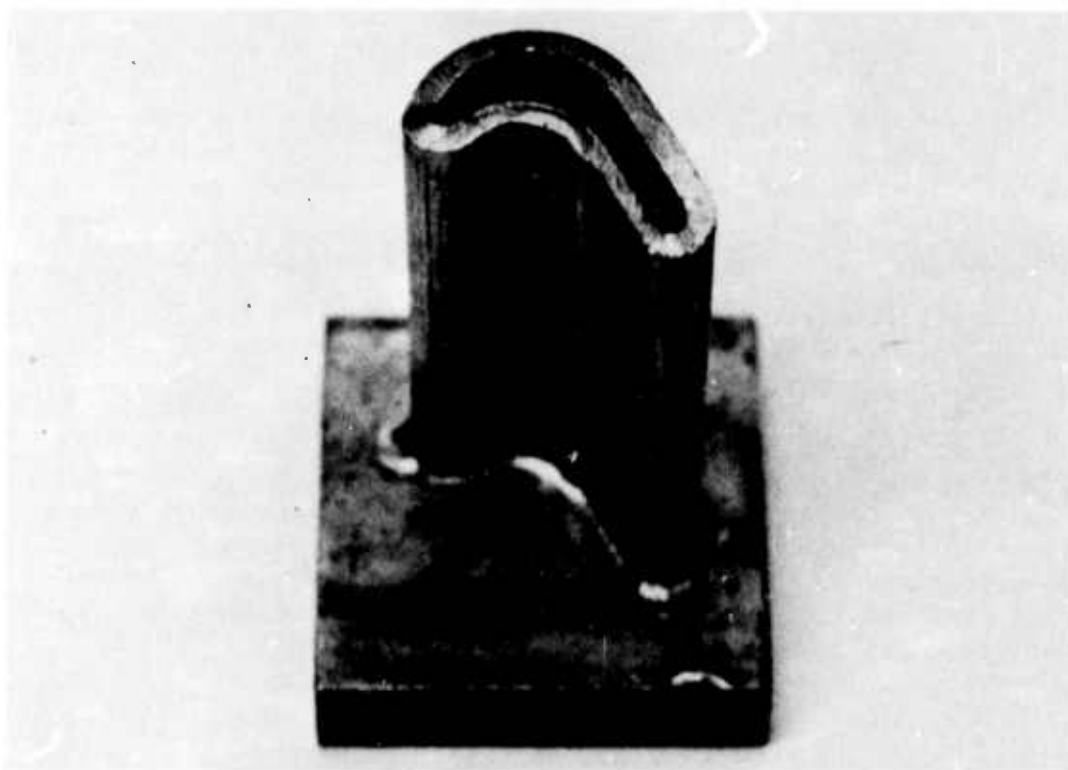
Ultrasonic Tool for Machining Constant Thickness Blades
